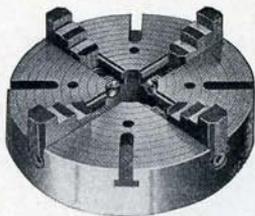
6-inch, 4-Jaw Independent Lathe Chuck, will hold 7 1/2-in. Cat. No. 2106. Price.....\$28.00
